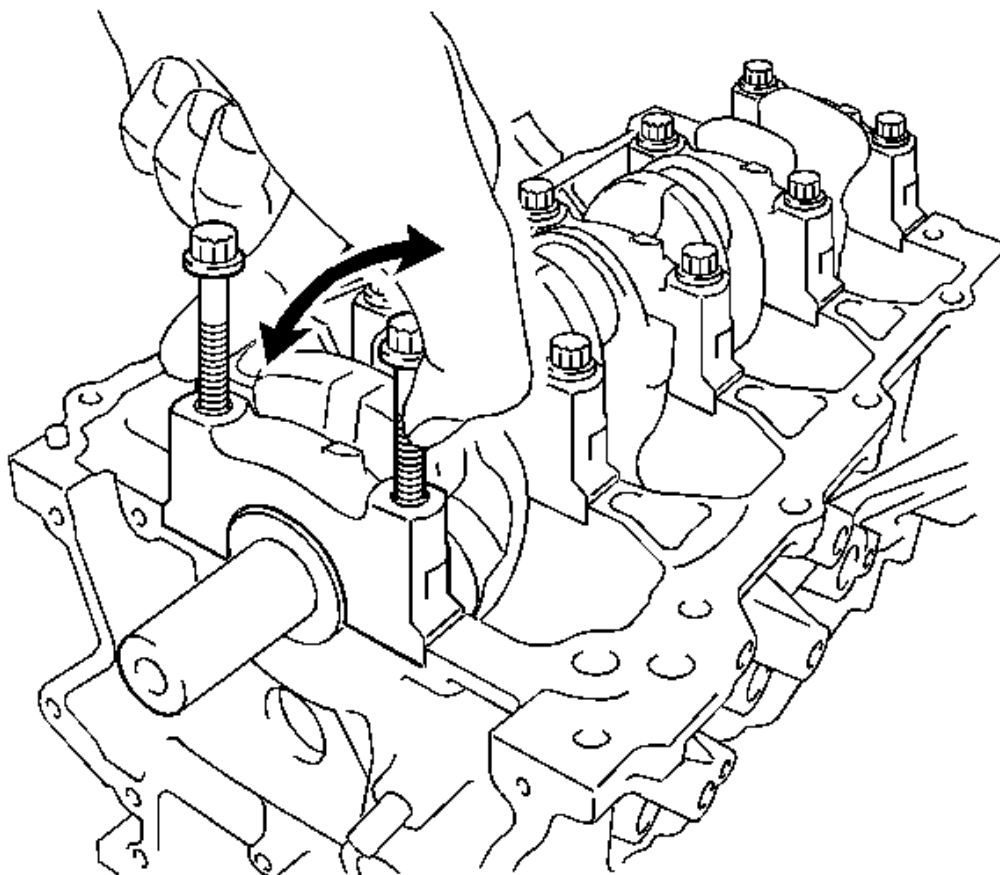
View Of Main Bearing Cap & Lower Bearing
